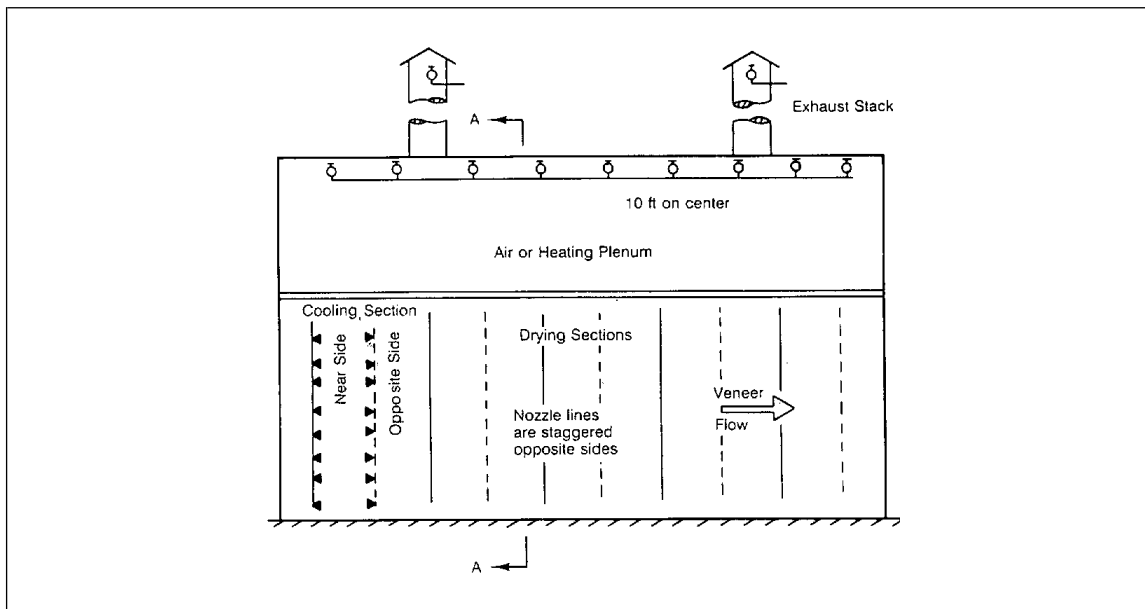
Typical arrangement of deluge protection for standard veneer dryer. See Fig. 5 for additional protection details.
